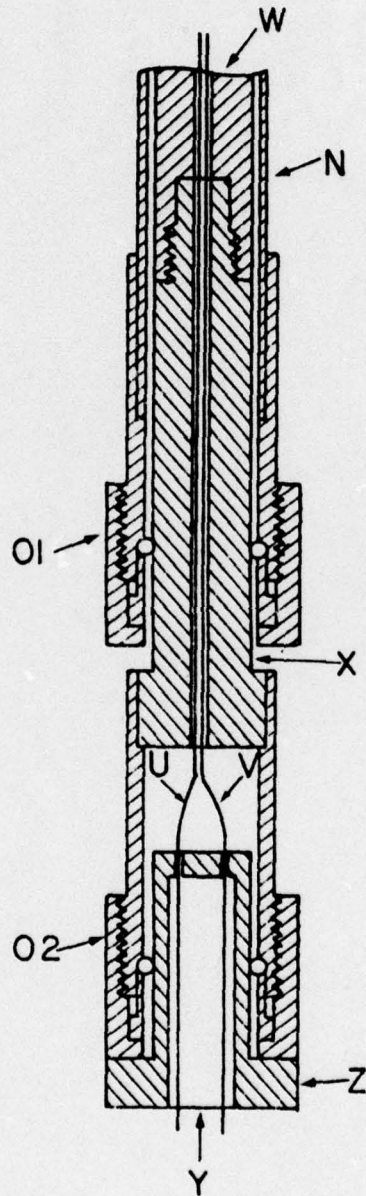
Bottom portion of the cavity assembly showing the lower sample stand and the lower vacuum seal.
